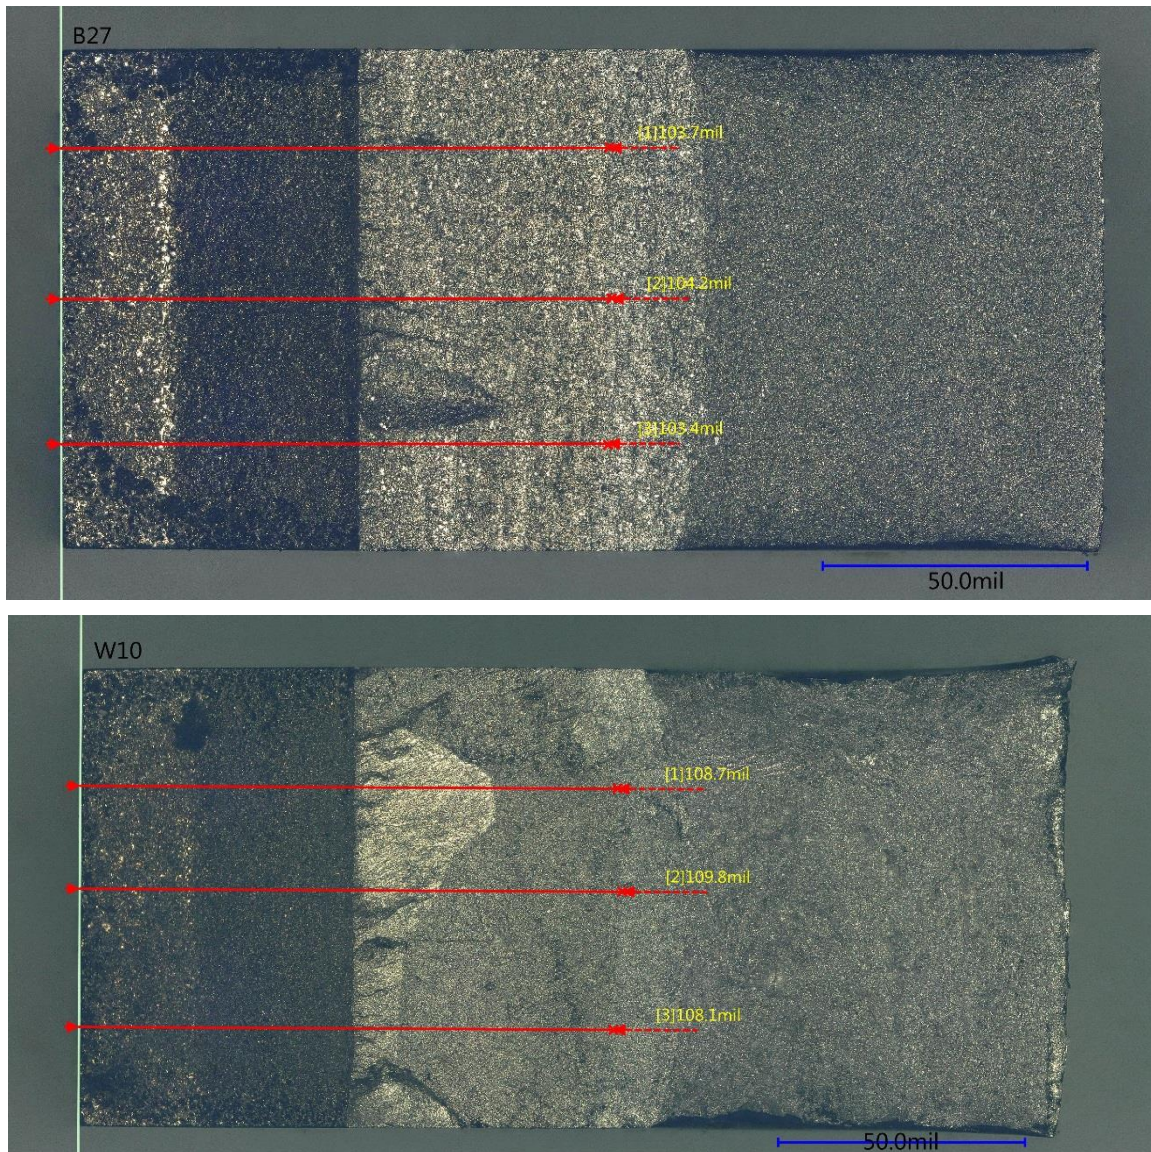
Fracture surfaces of bulk specimen B27 (top) and weld specimen W10 (bottom). There was no crack growth after 1,000 hours of exposure to AF-M315E at 50°C. The length of the fatigued pre-crack is annotated.
